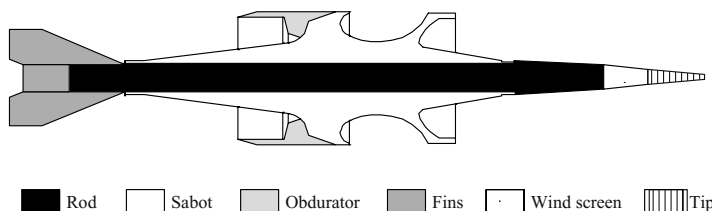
Schematic illustration of an M829 sabot-penetrator assembly
